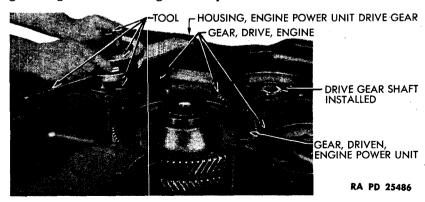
Inserting Shaft Plug Alining Tool To Aline Gear
